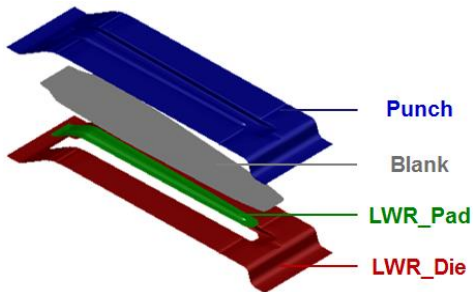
Finite element model of the tools and the blank used for the stamping analysis
